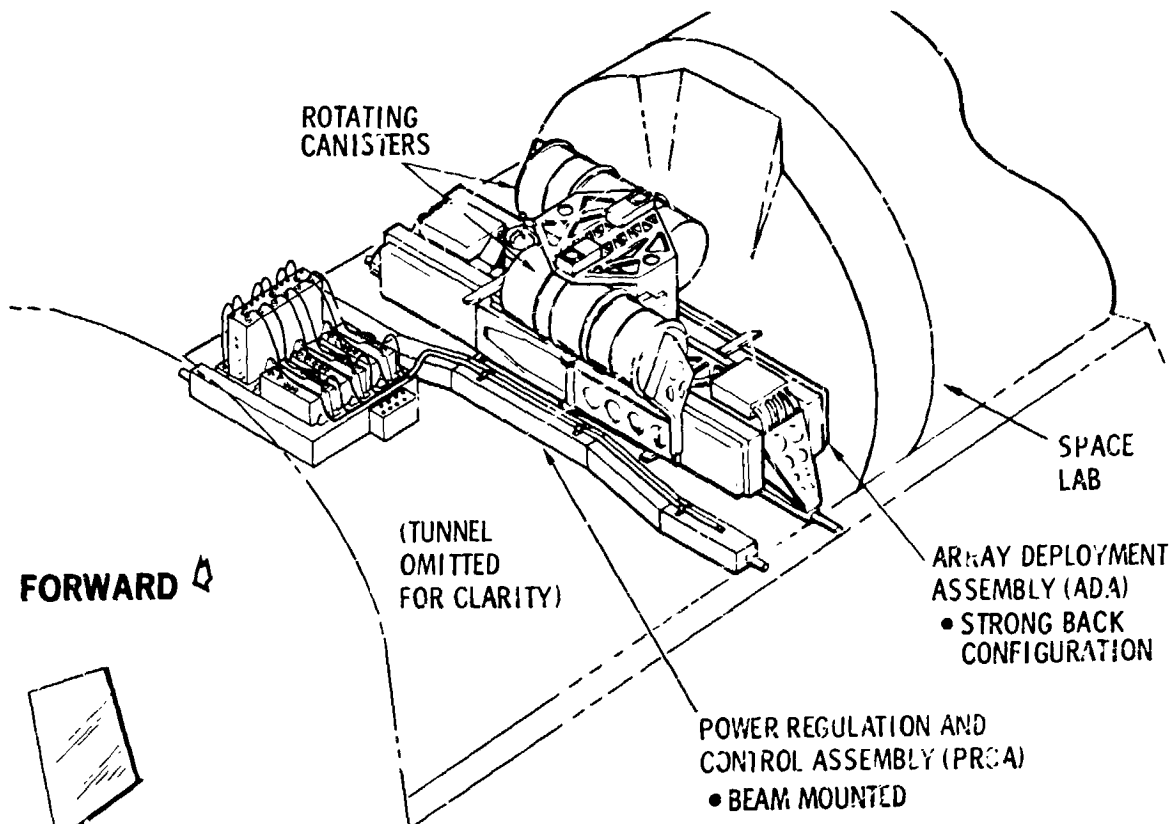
PEP Installed with Spacelab (Short Tunnel)
